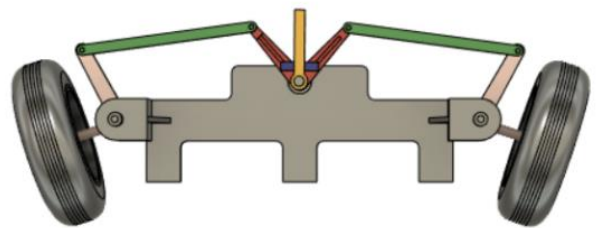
illustrates a top view of the toe adjustment mechanism depicting steering in neutral position with the wheel in the toe-out position
